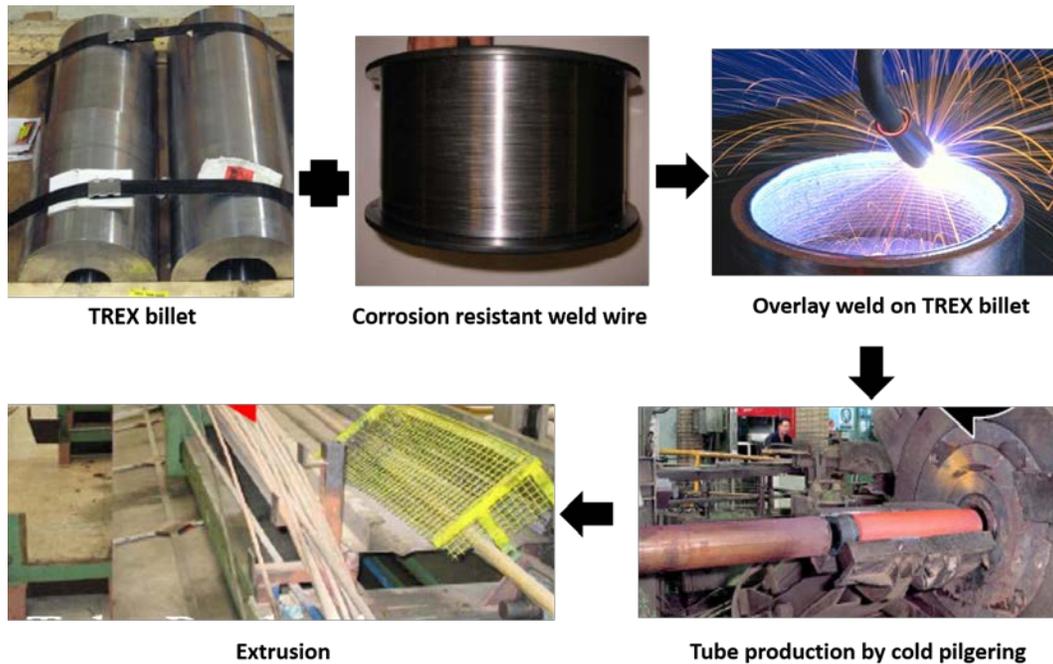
Example of MMLC cladding production process fabricated from welding and pilgering
